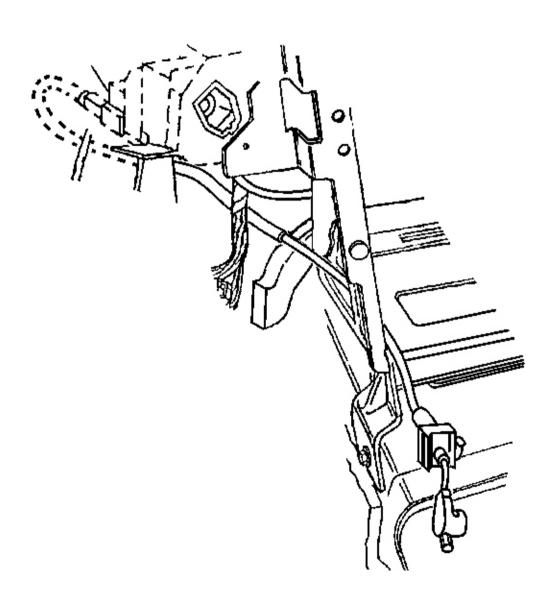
Park/Lock Cable & I/P Center Support Bracket Courtesy of GENERAL MOTORS CORP.
